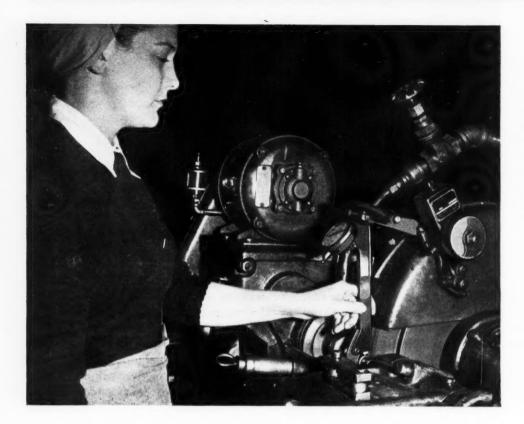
The Outside Diameter of Paired Bushing Halves is Finished to a Tolerance of 0.0005 Inch on This Cylindrical Grinding Machine with Automatic Work Sizing Gage
